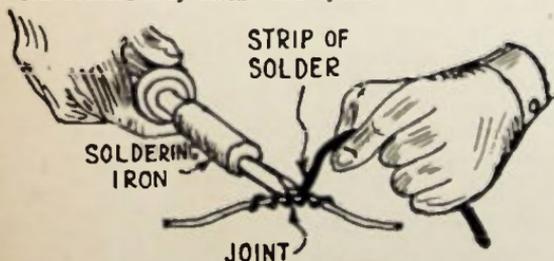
How the soldering iron and the strip of solder are applied to the joint.
